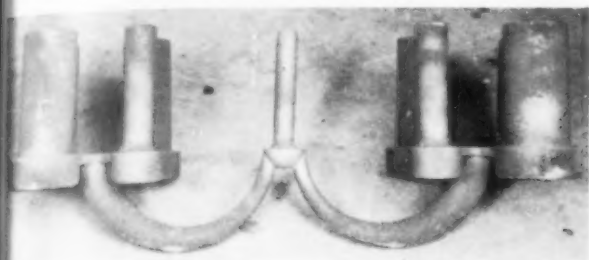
Completely solidified test casting of the type used for bleeding experiments.
